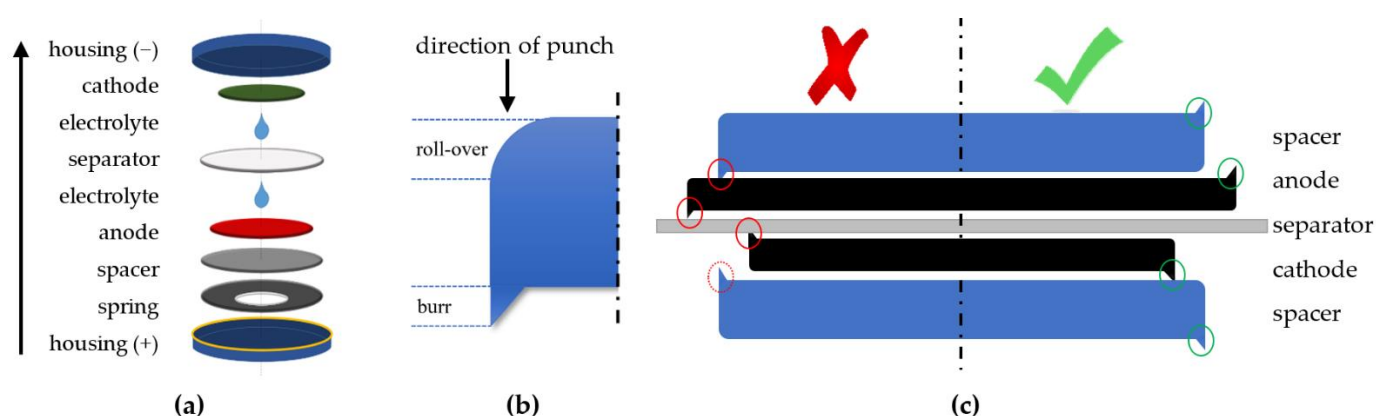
(a) Coin cell components and assembly order; (b) roll-over and burr of a punched disk; (c) assembly recommendations of punched cell components [17].
